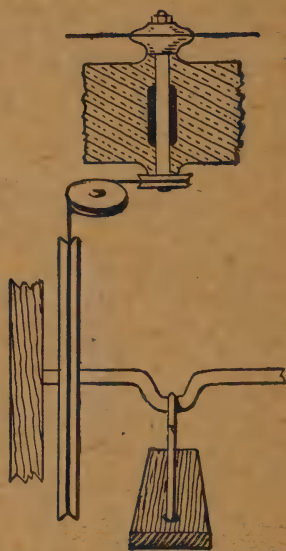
Suggested Treadle Drive for Polishing Machine
